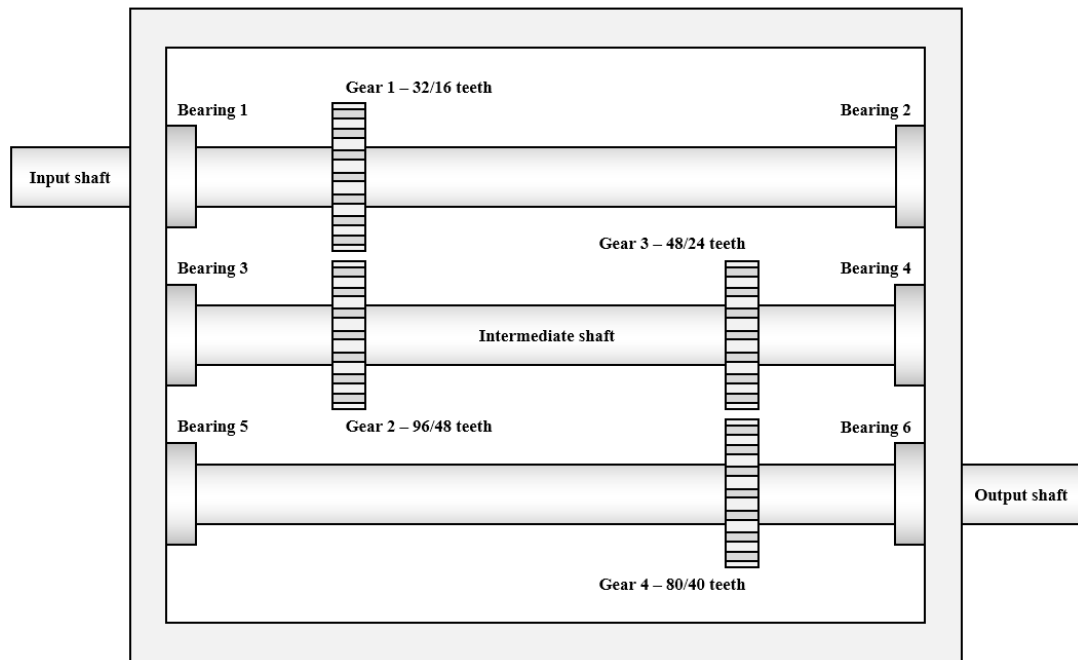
Gearbox test rig apparatus, adapted from [177]
